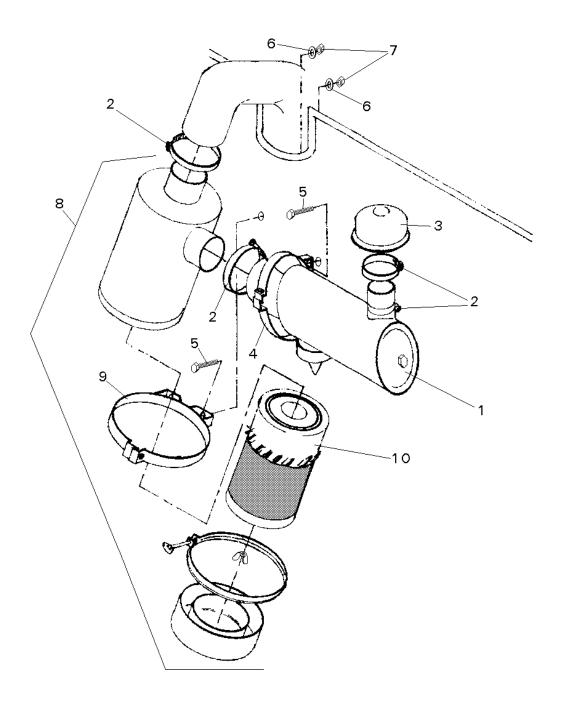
Air Cleaner Assembly, Diesel Engine (With Pre-Filter)
